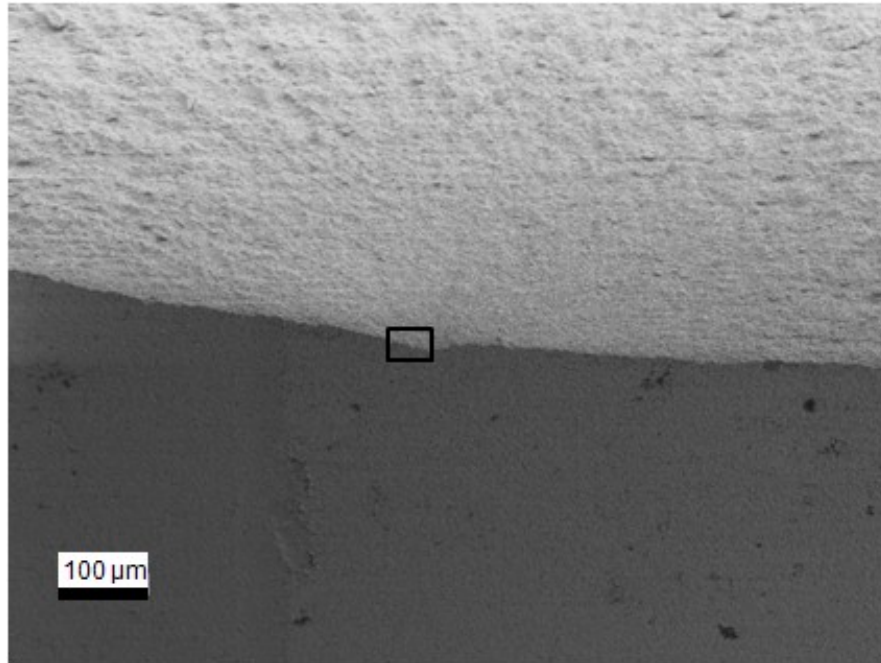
Fracture surface of a specimen of geometry S5 made of hard metal grade X2; image inclined under 45°; upper image section: fracture surface with centre of mirror zone [62] indicated by black rectangle; lower image section: EDMed lateral sample surface
